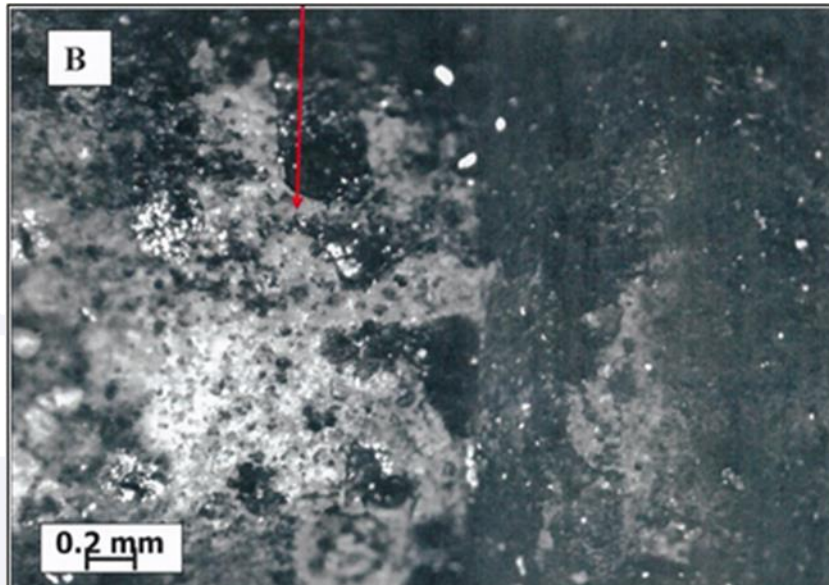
Image of the internal part of the Py Tube showing widespread corrosion.
